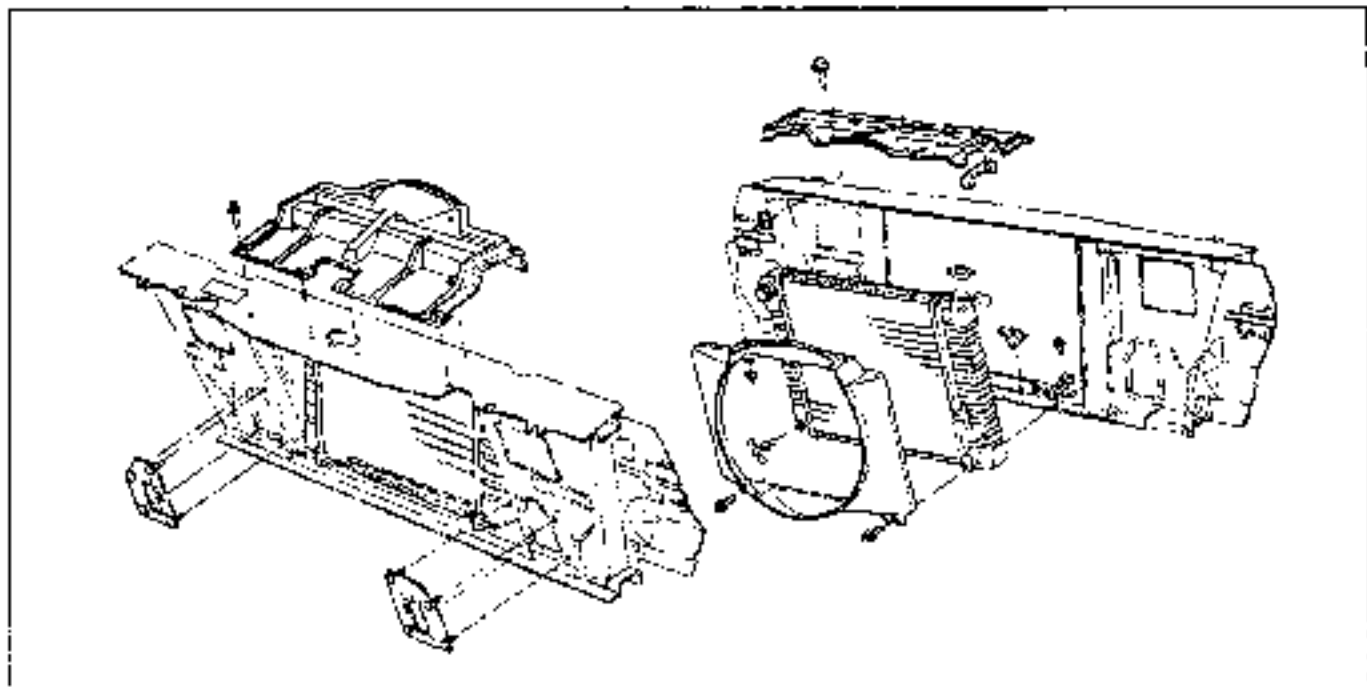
A-1 Radiator Support and Baffle Assembly - Pontiac
